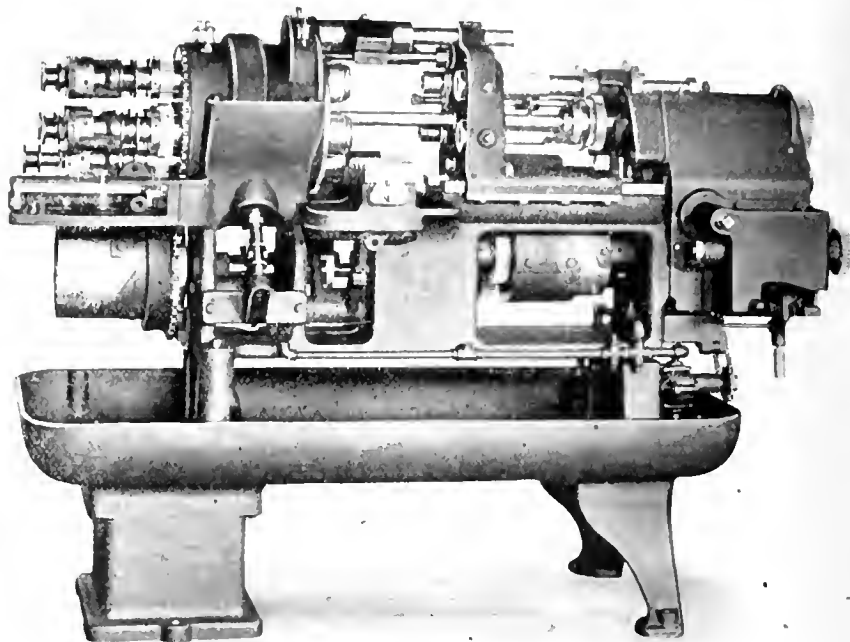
Gear-driven Peerless Multiple Spindle Screw Machine
